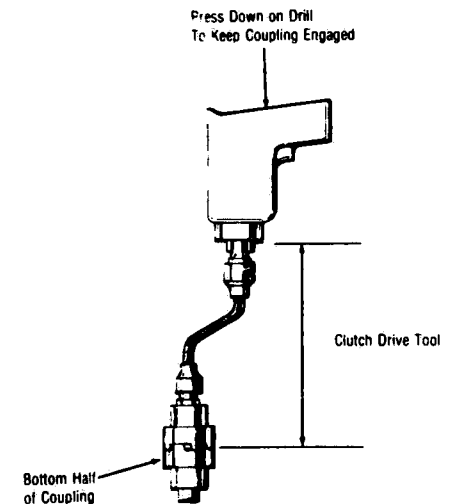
DRIVE TOOL POSITIONED TO DRIVE CLUTCH.
